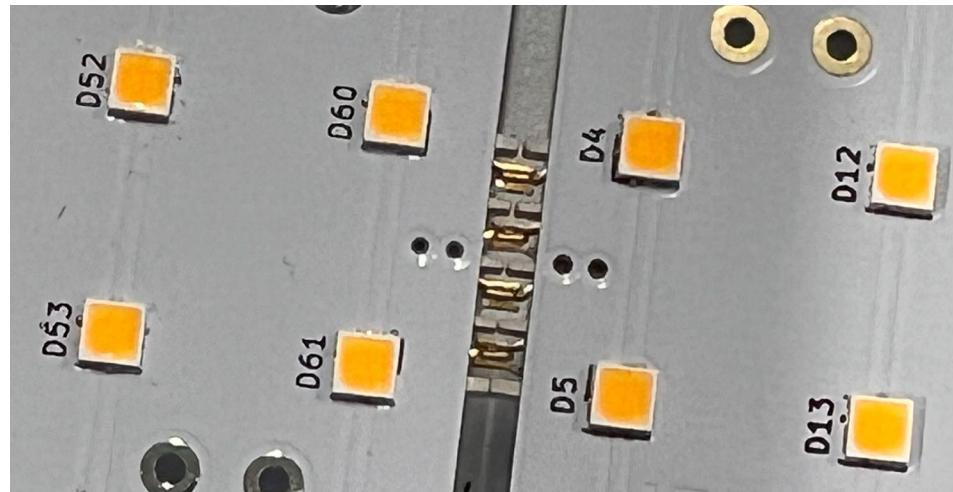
Two LED boards connected using the hermaphroditic interconnector
